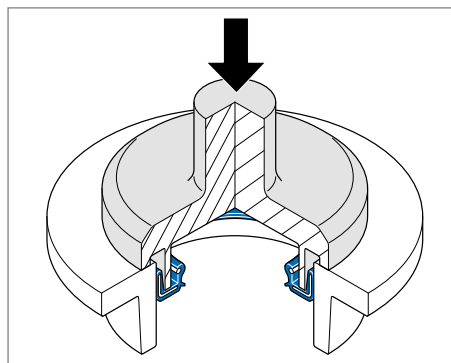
Installation from the back side. Outside diameter of the pilot shaft approx. 0,5 mm (0.02 in) smaller than the inner lining diameter of the seal. Please inquire if necessary.
